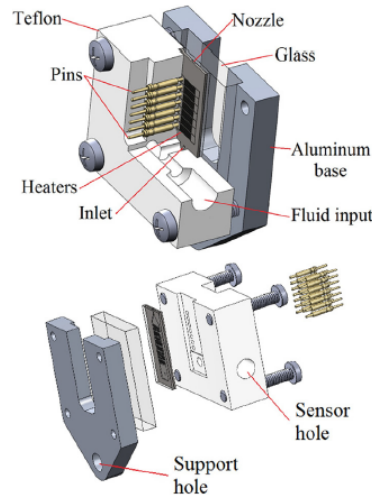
Top view and exploded view of the 1st generation teflon interface by Silva et al. [27].
